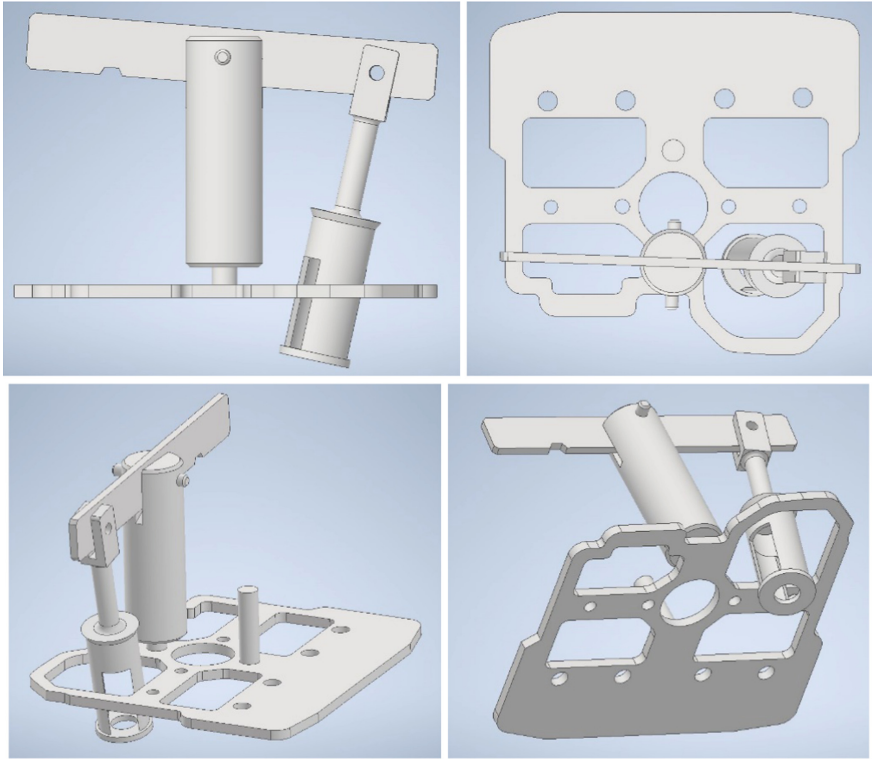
Valve stem seal removal tool 3D model assembly (Autodesk Inventor).
